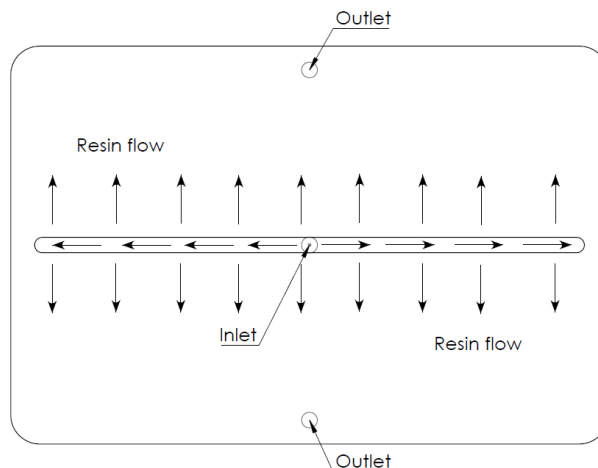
Injection flow pattern and location of the vacuum ports inside the mold cavity
